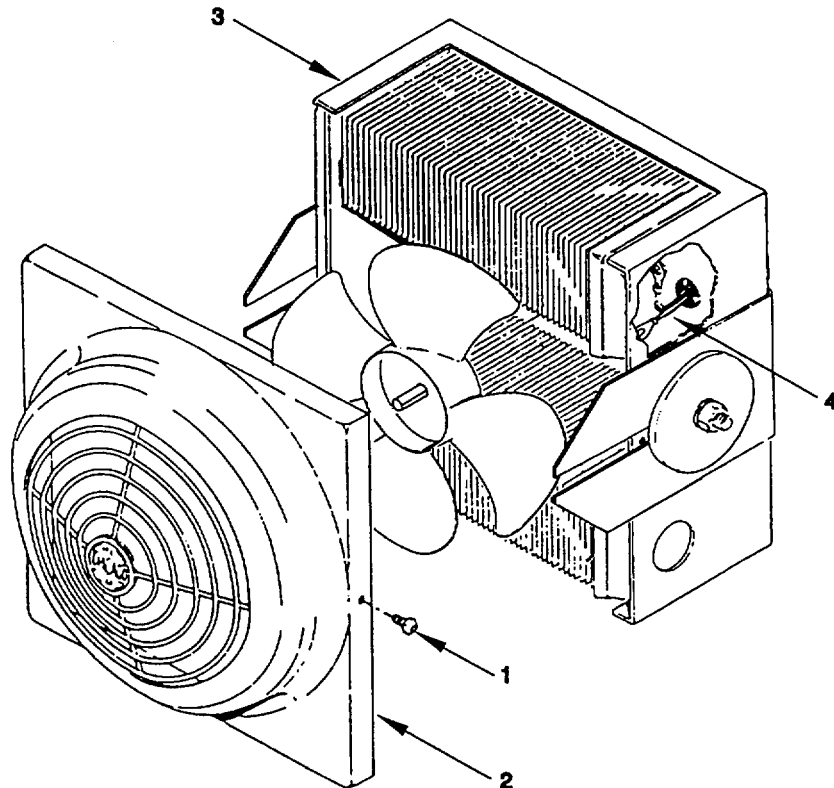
Defroster/Needle Valve, Remove/Install (Sheet 1 of 2).
